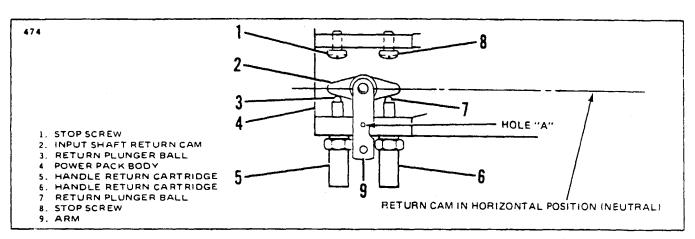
Handle Release Adjustment (Wiebel Tool)
